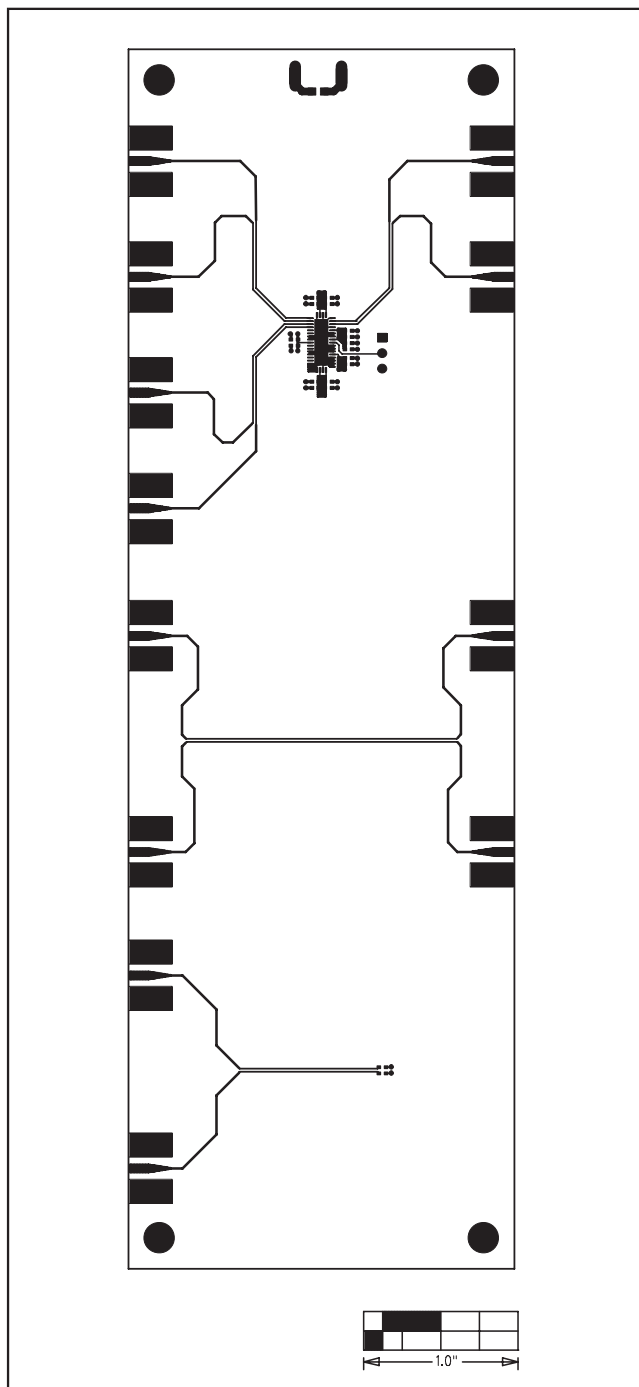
MAX4889B EV Kit PCB Layout—Component Side
